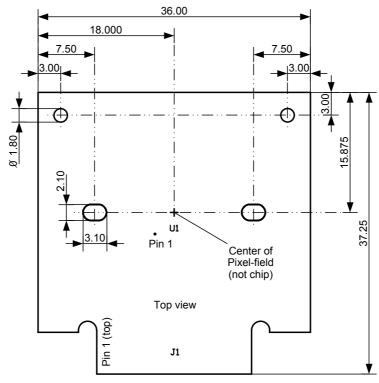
epc635 Card Edge Connector Carrier: Assembly top and bottom
